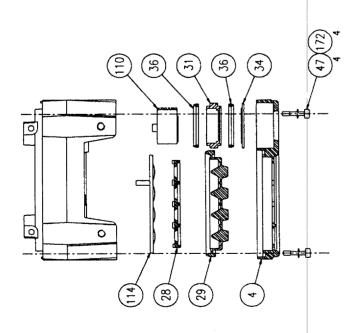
Front Panel Assy Unit 1 (Sheet 2)
